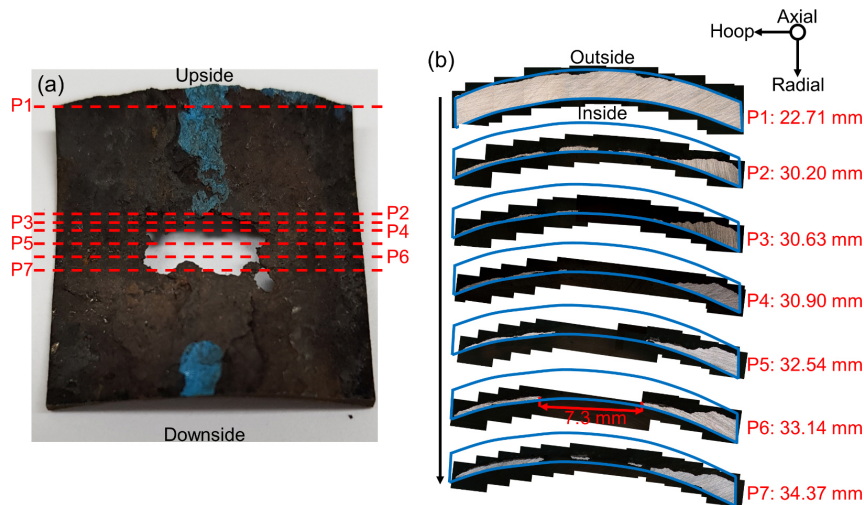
(a) Leak hole specimen machined from the damaged air vent, and (b) its cross-section views in terms of axial distance indicated in (a).
